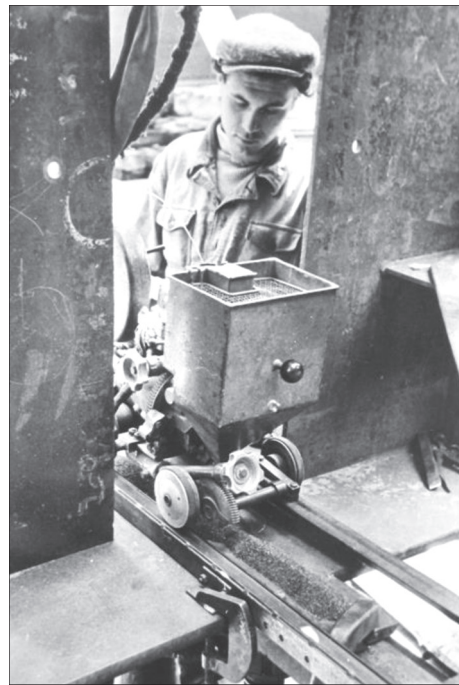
Example of applying automatic submerged arc welding of the lower girth while joining trusses of the main beams [4]
